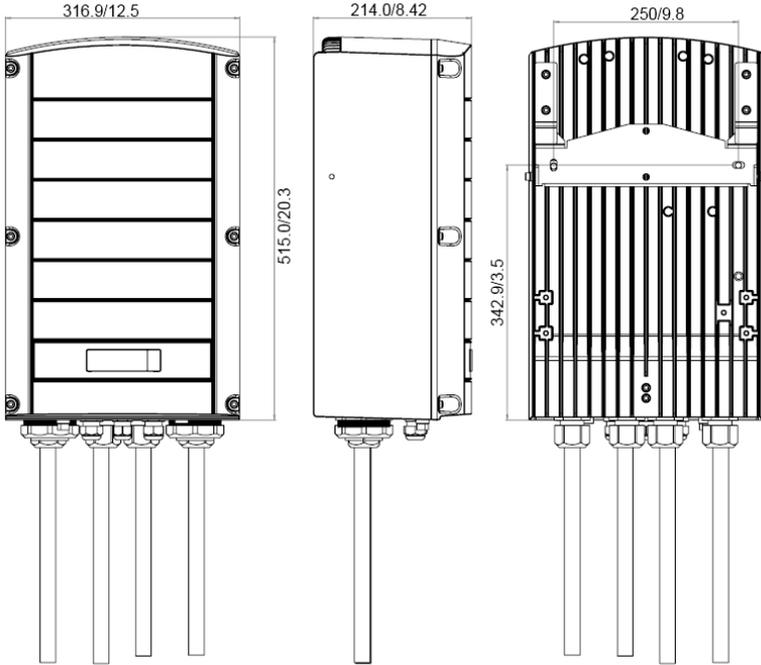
SMI vertical mounting - front, side and rear views (mm / in)
